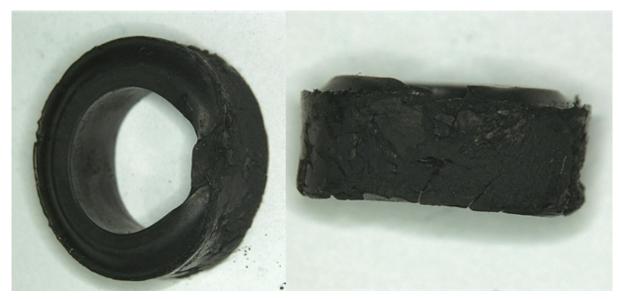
Two views of the packing removed from the fuel fitting after the second oil burner test
